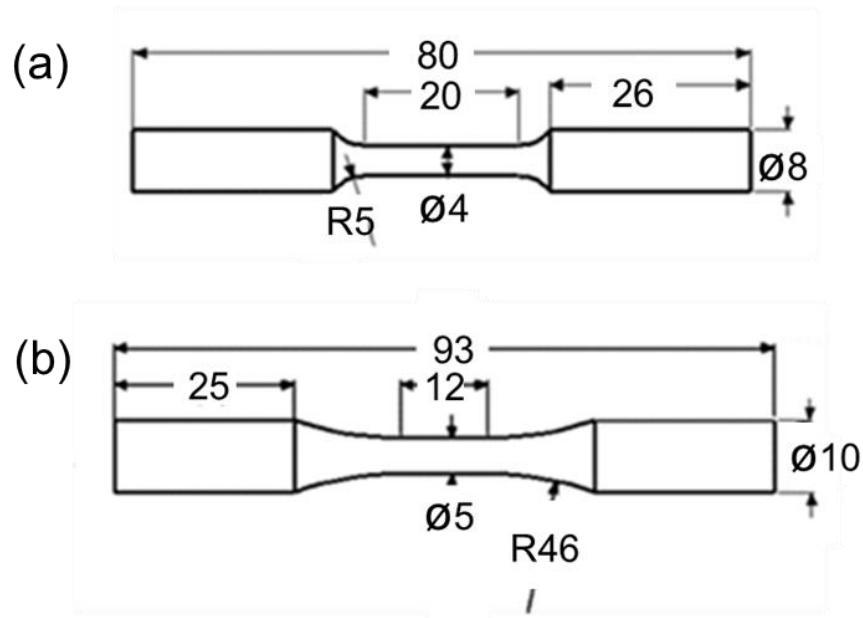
Geometries of (a) tensile and (b) fatigue L-PBF Ti-6Al-4V specimens. All the dimensions are in mm.
